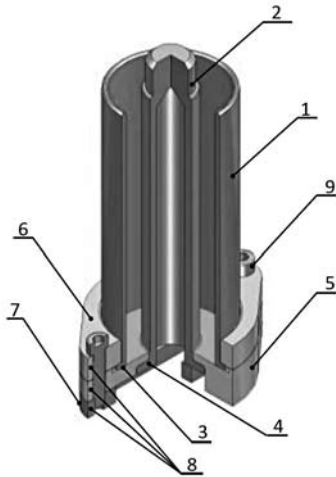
The mould for receiving samples: 1 – sleeve; 2 – forming core; 3,4 – flanges; 5 – bottom; 6 – clamping ring; 7 – pushing bar; 8 – holes; 9 – connection screw. The internal part of the sleeve surface, the upper part of the bottom and the external part of the lateral surface of the forming core, which make the inner surface of the mould chamber, are covered with an anti-adhesive teflon layer
